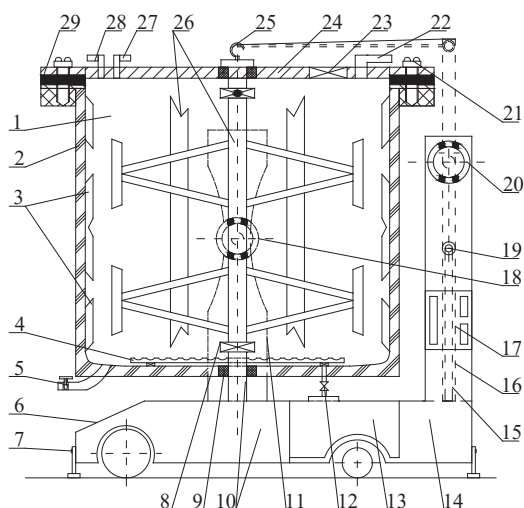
Diagram of UMD-200 universal multifunctional device: 1 – internal operation technological capacity; 2 – flexible film resistive electrical heater of the radiating type with a heat-insulating outer surface (FFREhRT); 3 – technical separators; 4 – removable head of a bubble sprayer; 5 – drainage tap for technological liquid; 6 – mobile platform; 7 – stop lockers; 8 – quick couplings; 9 – node junction with a bearing; 10 – engine section with an output rotary shaft; 11 – central support for fixing of the operation technological capacity; 12 – automatic fuse of a steam line; 13 – section for a steam generator; 14 – section for vacuum creation; 15 – vacuum pipeline; 16 – auxiliary technical retractable lifting rack with a rotational mechanism; 17 – speed control unit for quick coupler 8, with technological capacity heating temperature, steam pressure and vacuum; 18 – mechanism for inclination of operation technological capacity; 19 – linking branch pipe for flexible vacuum hose; 20 – lifting mechanism of auxiliary technical retractable lifting rail with rotational mechanism 16; 21 – roller bolts; 22 – linking branch pipe of the flexible vacuum hose 19; 23 – hermetic loading hopper; 24 – lid of the operation technological capacity; 25 – hook for lifting the lid; 27 – replaceable modular element in the form of a stirrer; 27 – automatic safety valve; 28 – mechanical pressure relief valve; 29 – rubber seals
